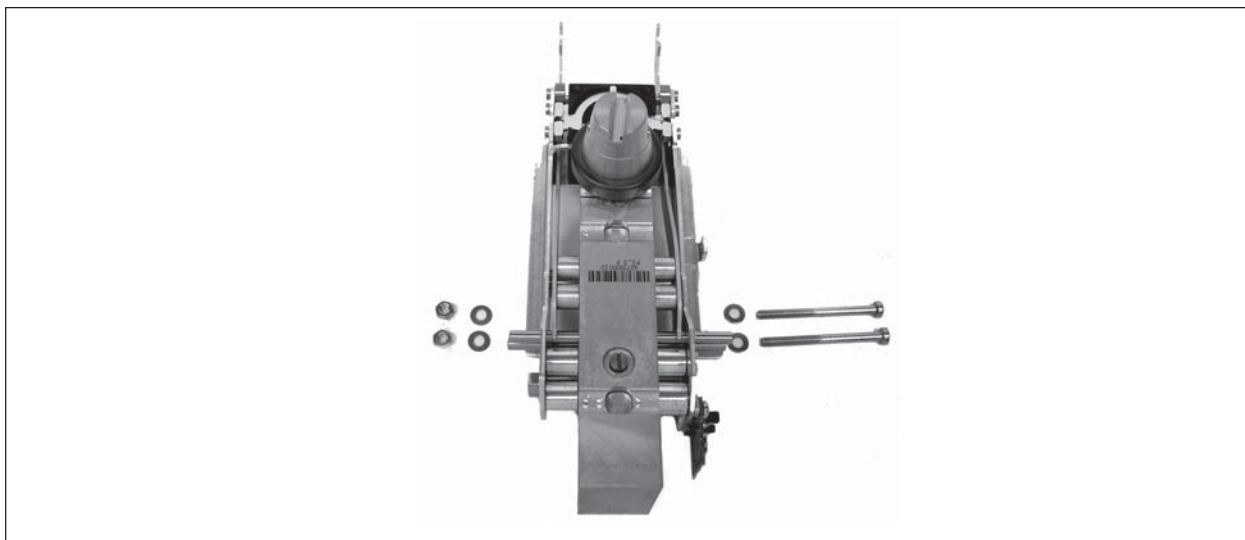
InCal Weight Arm Screws and Washers Removed.
